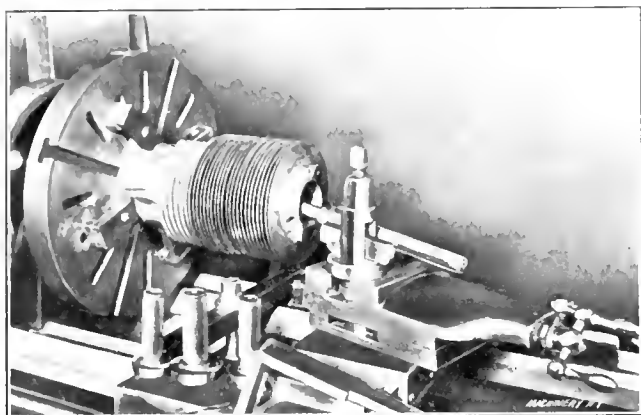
Finishing Valve Seat Hole in Top of Cylinder.
